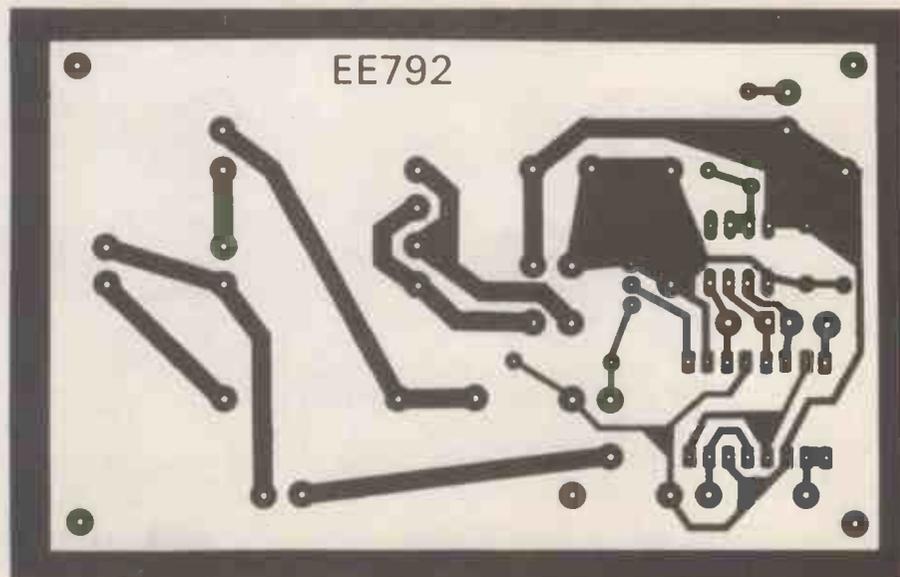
Printed circuit board component layout and full size copper foil master pattern.
